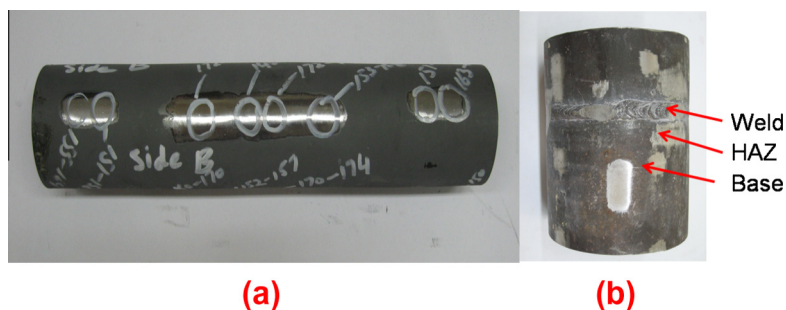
Un-welded (a) and welded specimens showing base, HAZ and weld regions (b).
